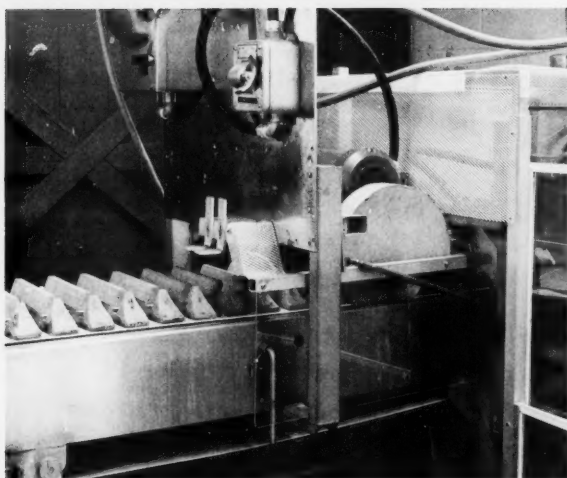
The cleated conveyor used to bring the fish by the rotating blade to be headed.
